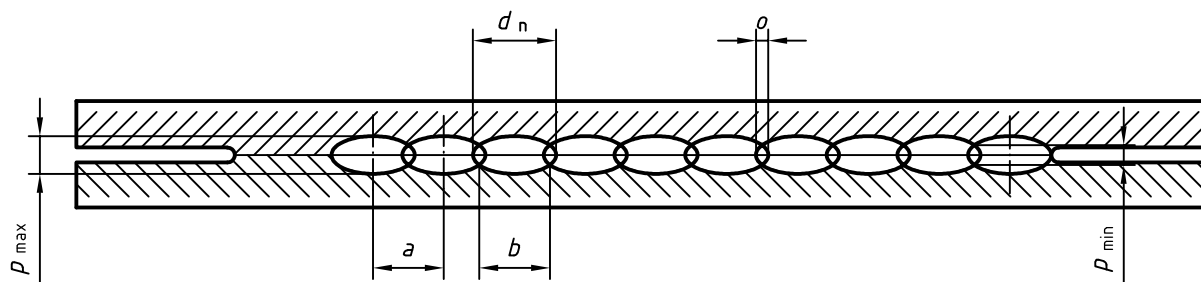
Longitudinal cross-section of a seam weld taken parallel to the welding direction
